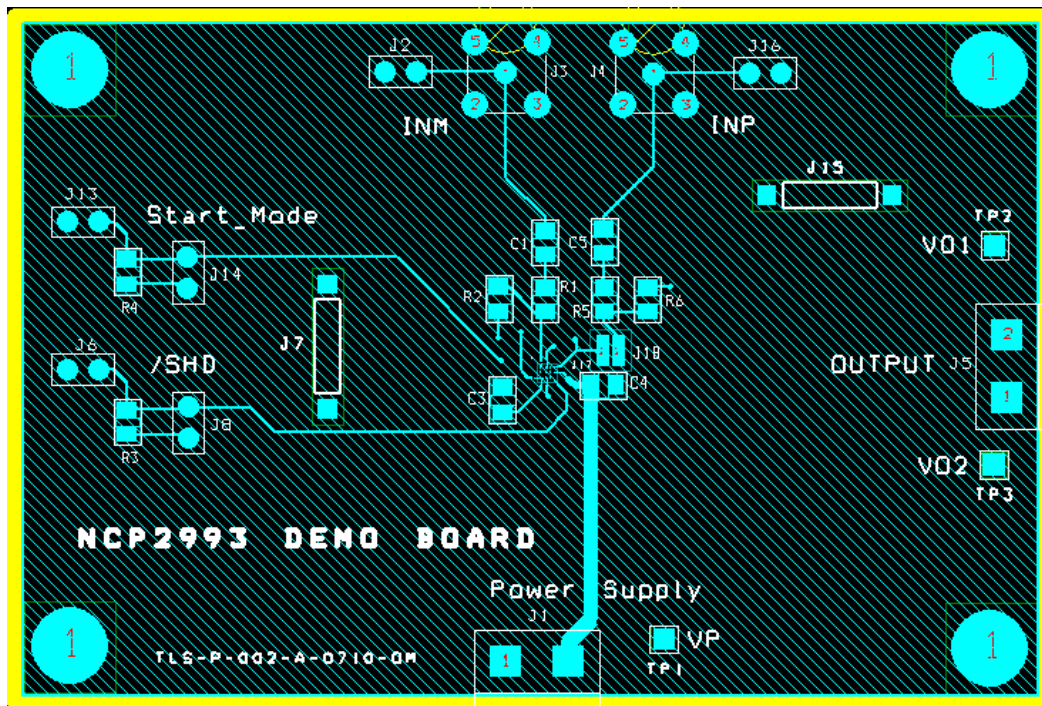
NCP2993FCT2GEVB Board Layout (Top View)
